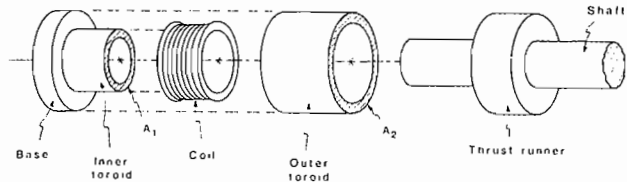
Exploded View of Single Acting Magnetic Thrust Bearing.
